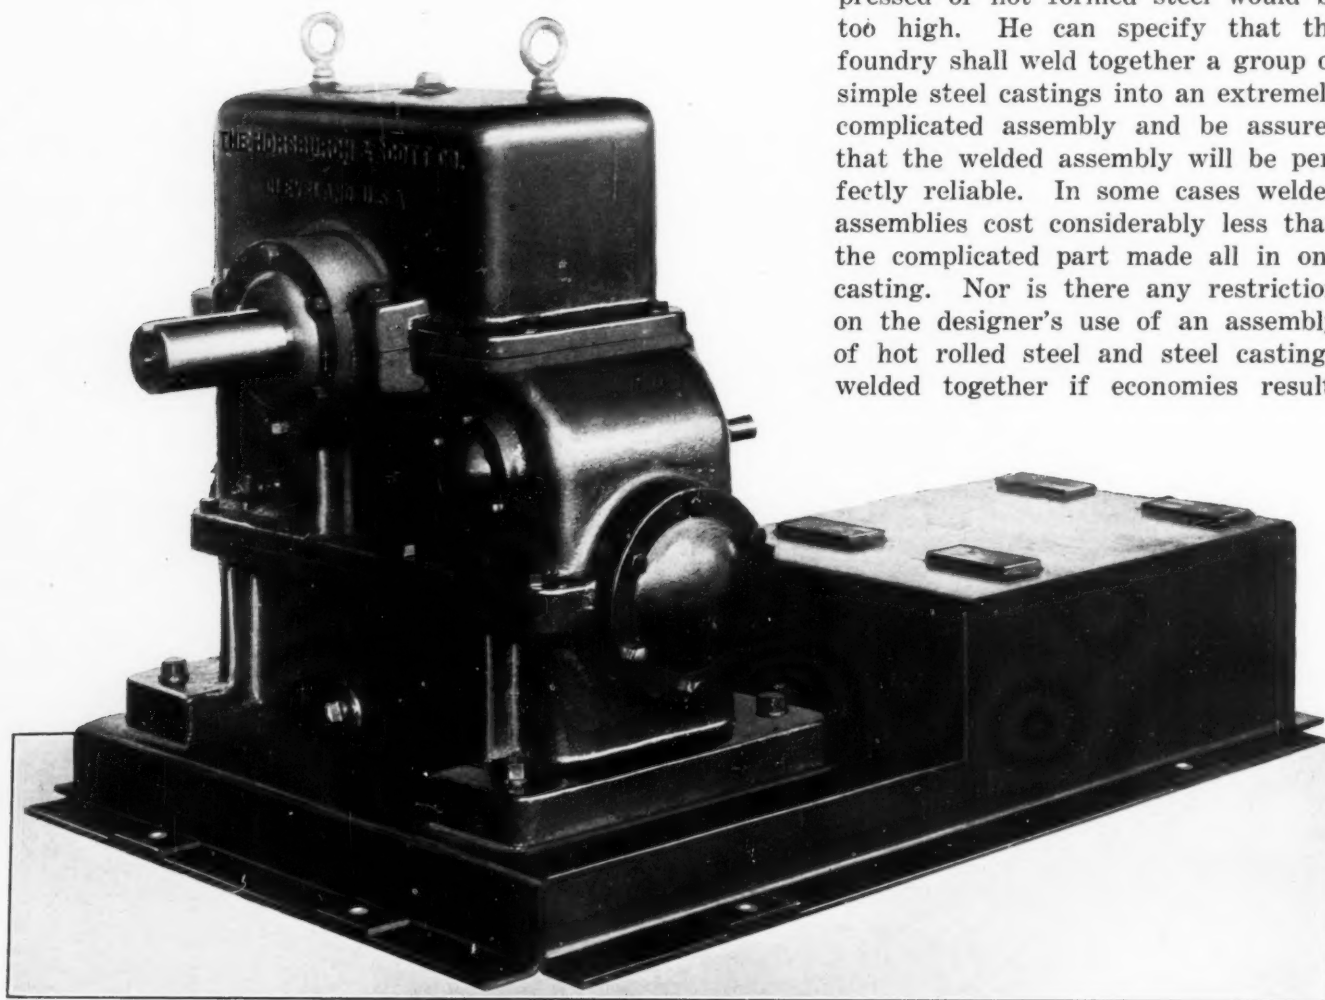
Welded steel plate base for worm and gear speed reducer. Gray iron castings prove more economical than welded steel for gear case
